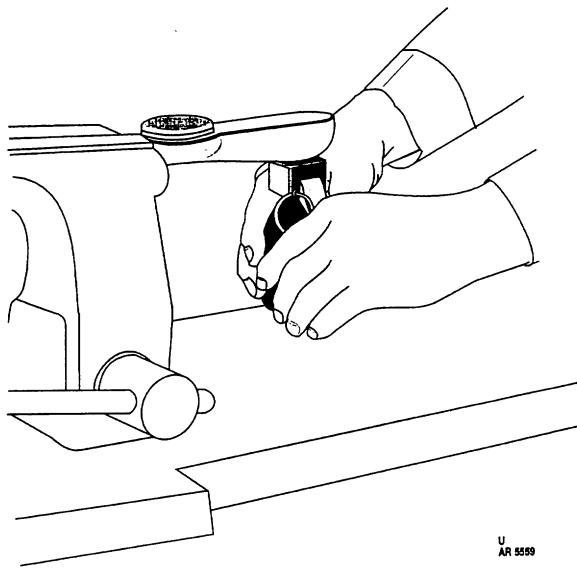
Defuzing or torquing of hand grenade fuze.
